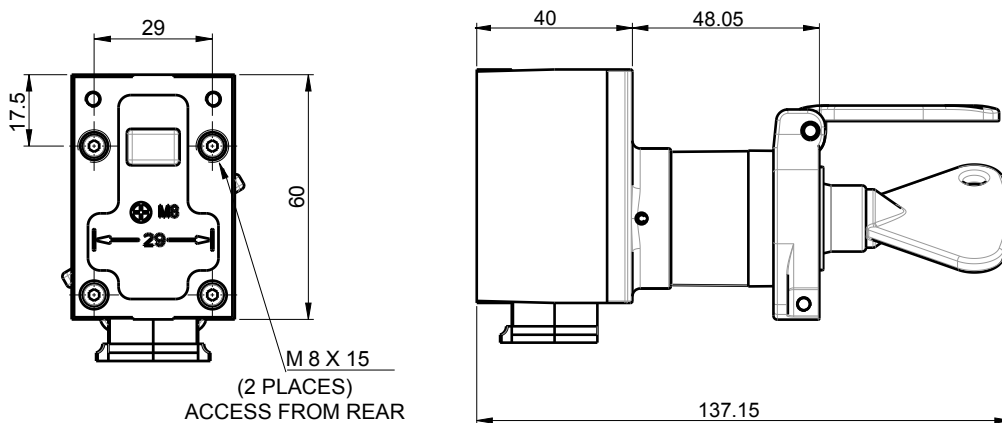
Dimensional Drawing - *proLock* with Key & Standard Dustcover
